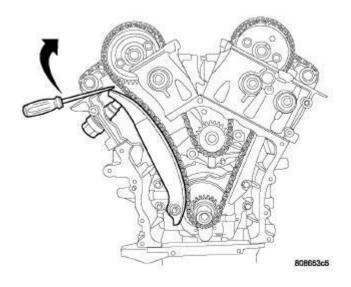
TIMING CHAIN TENSIONER ACTIVATING Courtesy of CHRYSLER LLC
